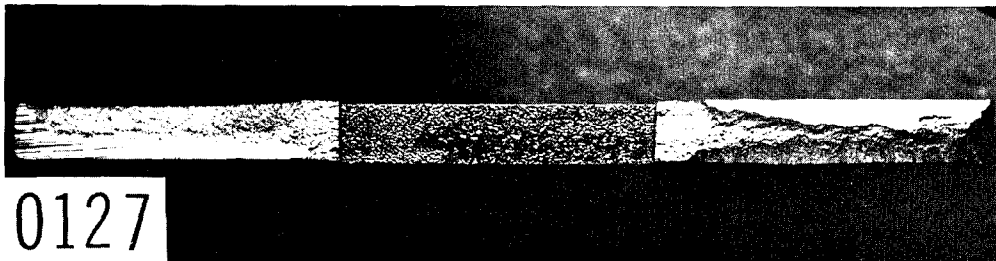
RW fracture surface in a Ti-2-1/2Al-16V alloy center-cracked crack toughness specimen. 5X.
